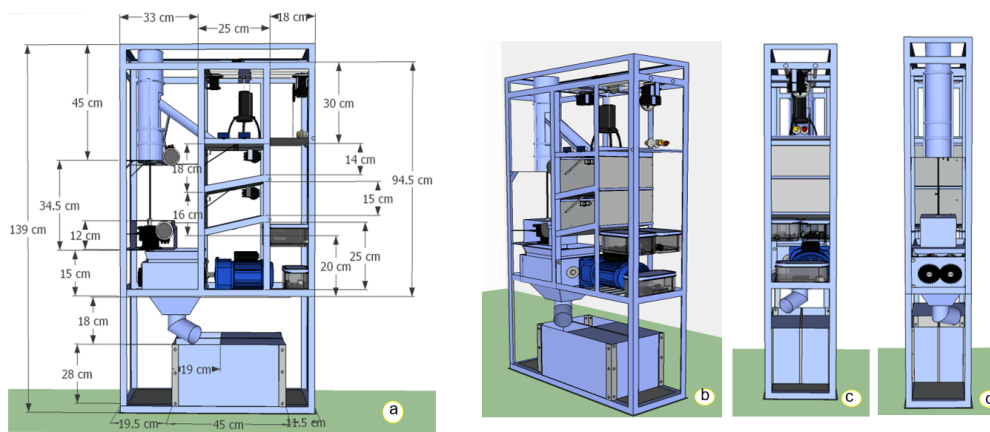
The prototype design in 3D): (a) front elevation with dimensions, (b) isometric, (c) left and (d) right side elevations
